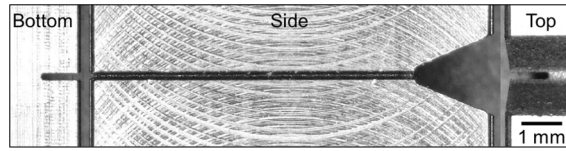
Photomontage of a CVN-mod sample showing the bottom, side, and top views of the side groove notch introduced by EDM.
